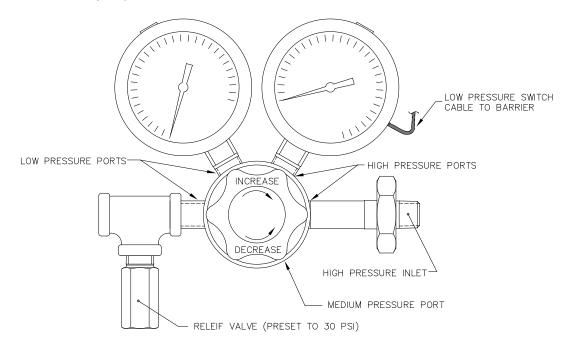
Calibration Gas Pressure Regulator with Relief Valve
